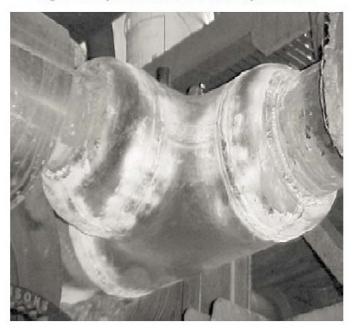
Example of a Welded Leak Box Repair of a Tee
